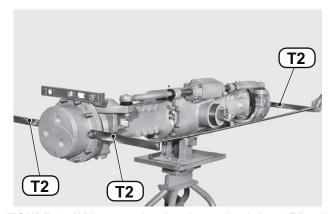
Without moving the piston, check front "B" and rear "A" using tool T1 (See drawing T2 p. 45) at "R" value. R = 400 mm (see picture below).
